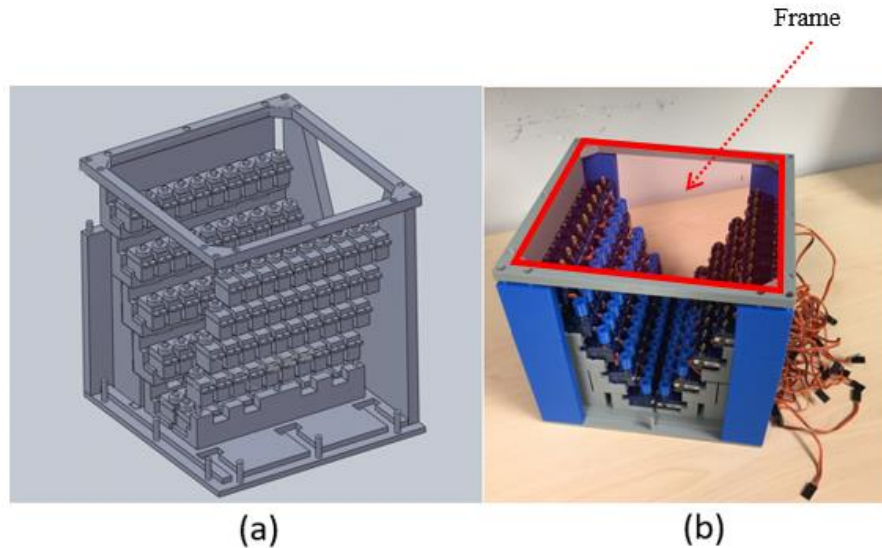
Electro-mechanical control system: (a) 3D view of the motor support structure, (b) Motor control system fabricated with a 3D printer
